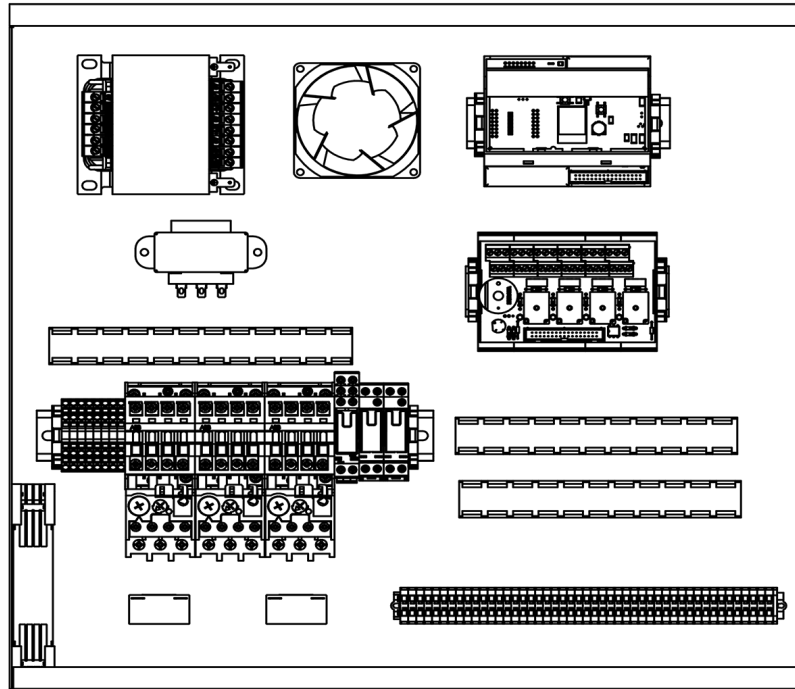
Electronic cabinet (Cables, and aux board removed for better vis.)
